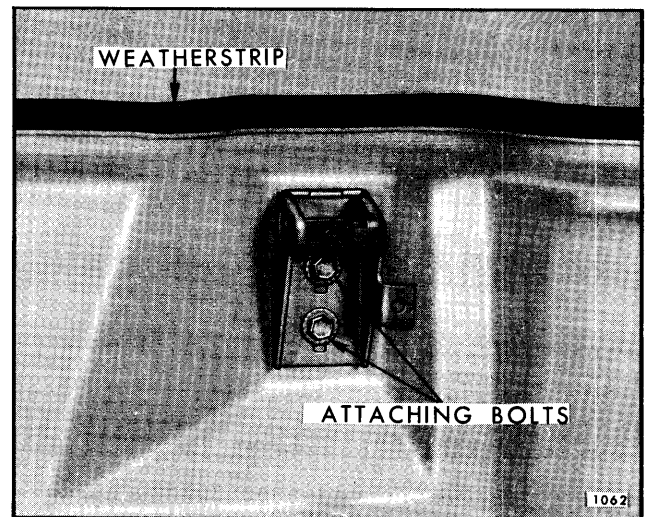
Engine Compartment Lid Latch Striker - "Z" Styles
